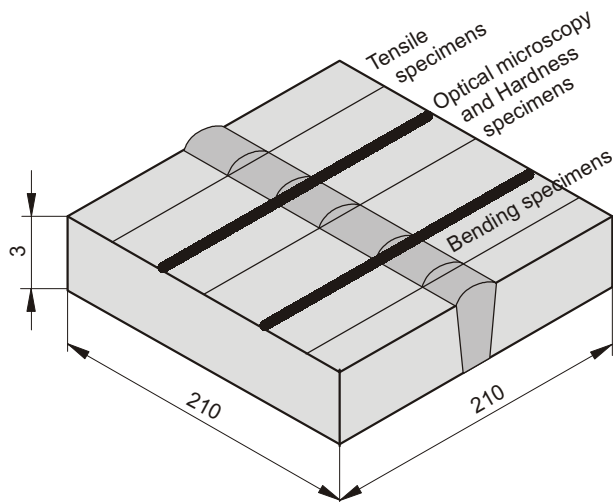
Schematic picture of the welded material and extracted specimens
